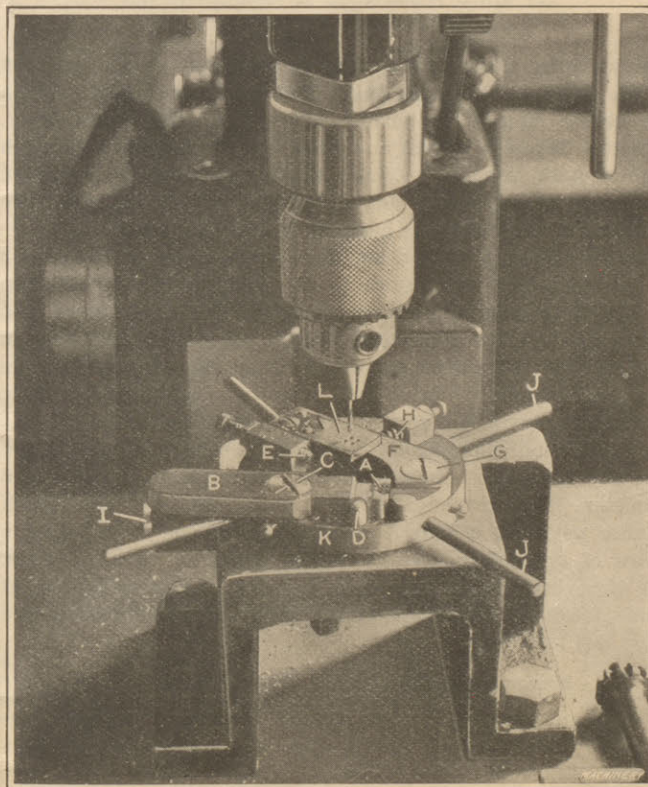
Drilling Percussion Primers on a Leland-Gifford Ball Bearing Sensitive Drilling Machine
